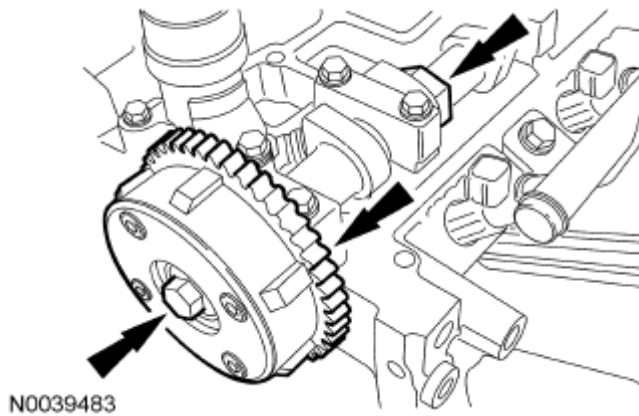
Locating Flats On Camshaft, Bolt And Camshaft Phaser And Sprocket
